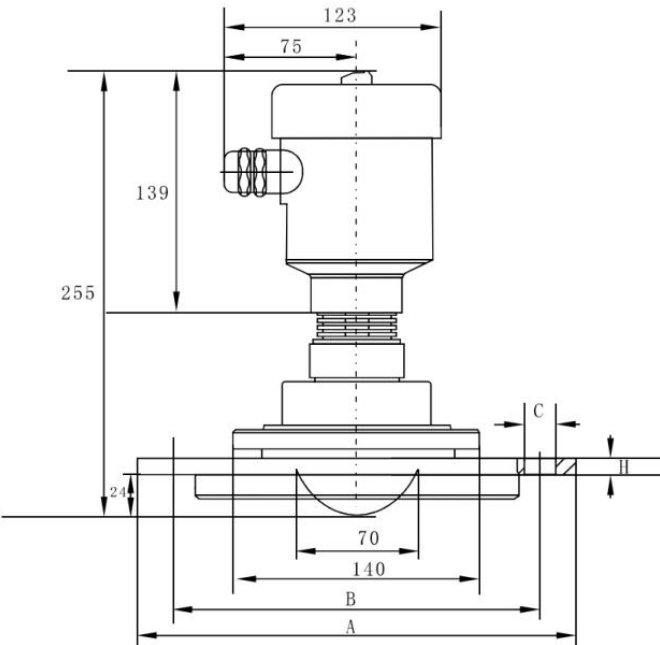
Dimensional Drawing of High-Temperature Threaded Connection Structure (Unit: mm)
